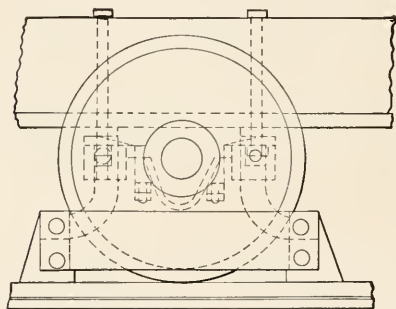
A Sawmill Carriage Track-cleaning Device of the Drag-shoe Type.
